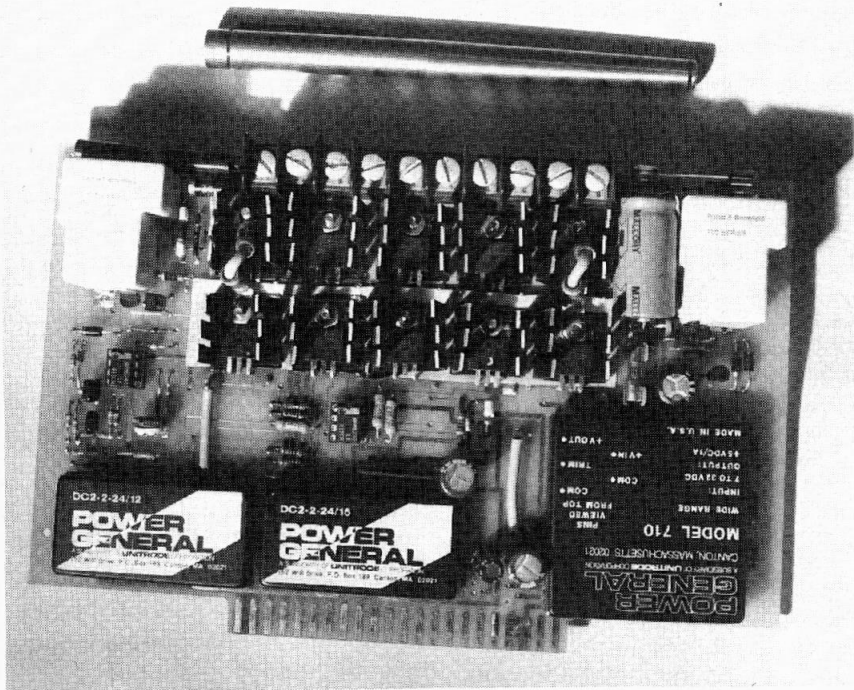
AN ASSEMBLED POWER BOARD should look similar to this one.
